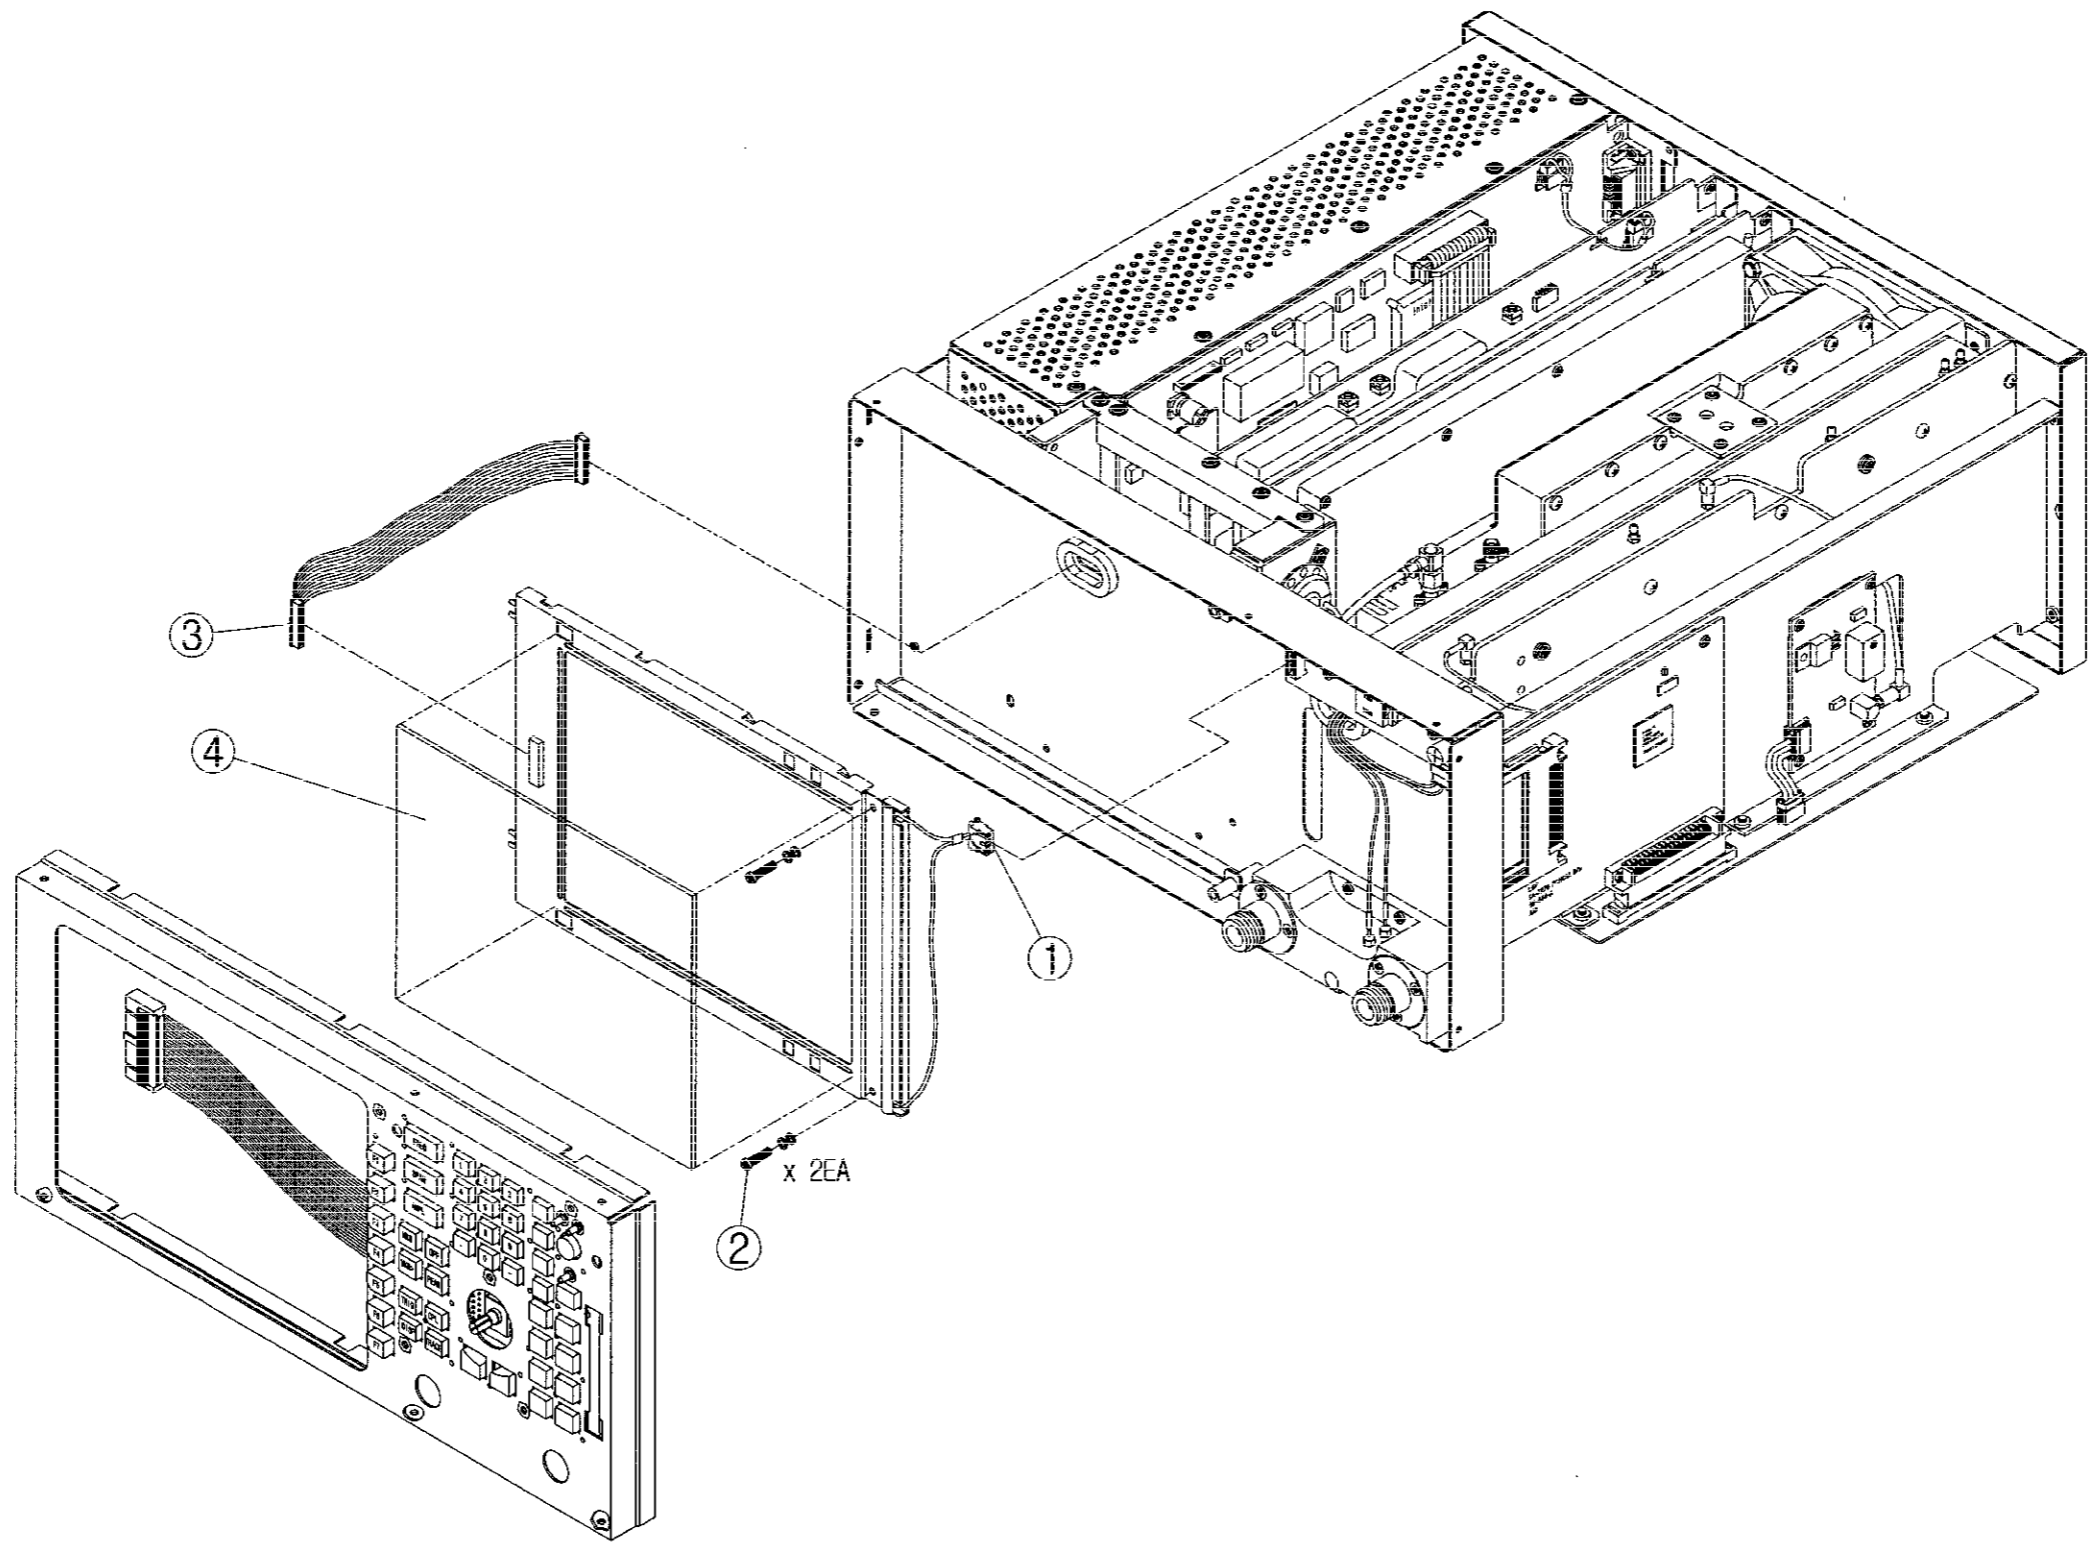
LCD FRAME ASSEMBLY
